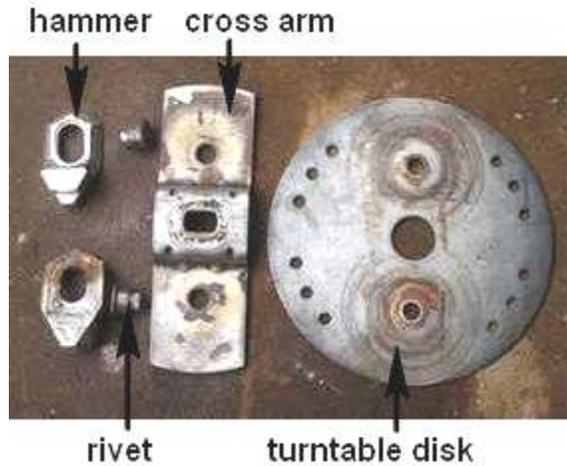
Disassembled turntable. Grind off the rivets to separate cross-arm from hammers and turntable. Tap threads in the rivet holes of the cross-arm.
